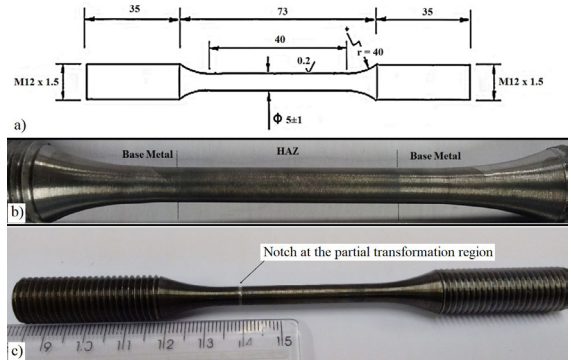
Specimen for the tensile and fatigue tests. (a) Specimen dimensions (mm); (b) specimen from the welded joint etched with Nital 4% highlighting the HAZ; (c) specimen from the welded joint with a notch at the end of the HAZ (partial transformation region).
